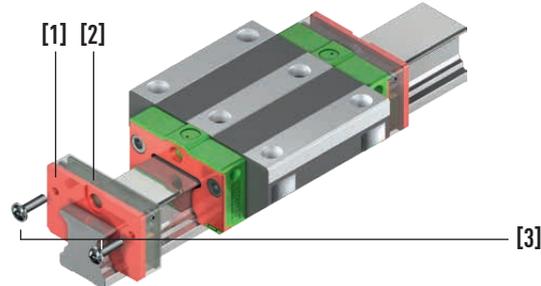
Exploded view of self-lubricating EC block for the CG series
